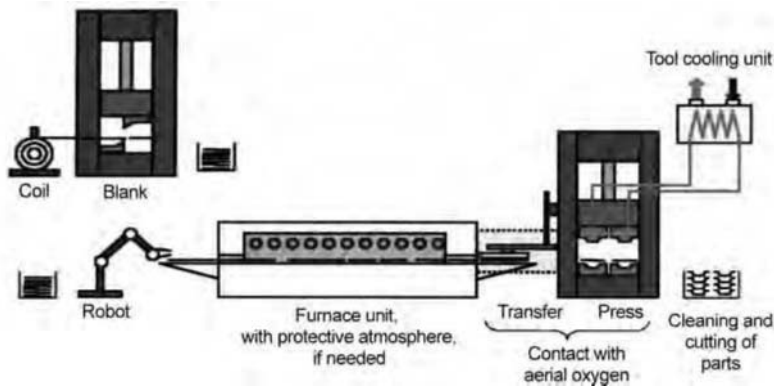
Principles of hot stamping (heating in furnace/forming and quenching in press)
